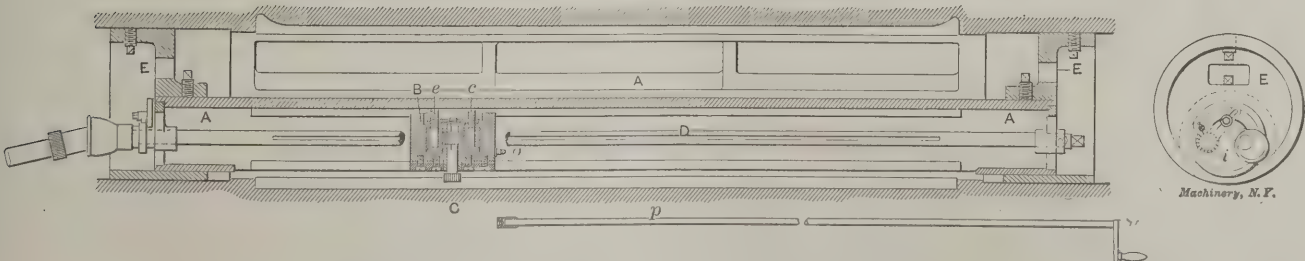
Detail of Portable Tool for Milling Corliss Engine Cylinders.
